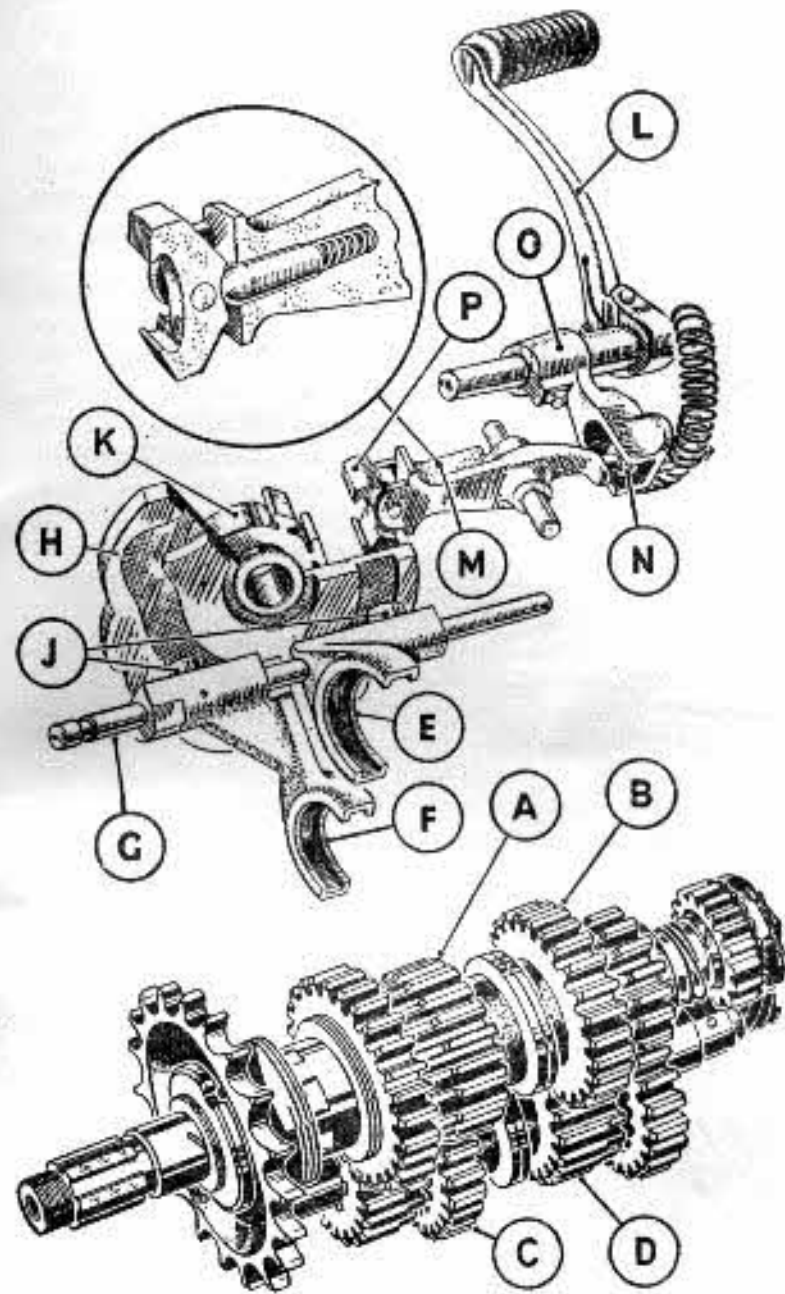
FOOT GEAR CHANGE AND GEARBOX
